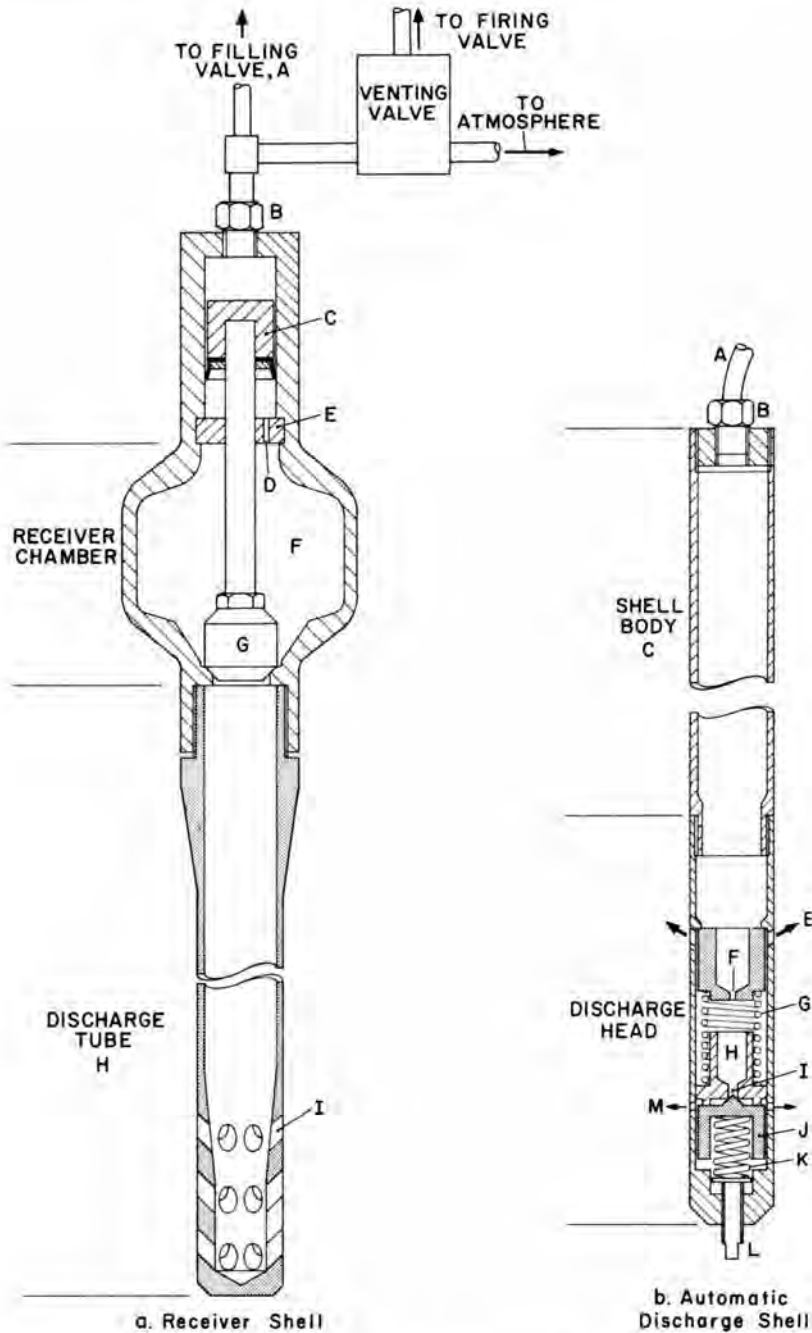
Details of two types of airblasting shell: (a) Receiver shell (C-piston for seating and releasing piston assembly, G-discharge valve, I-discharge ports); (b) Automatic discharge shell (E-discharge ports, F-spring-loaded piston, H-spacer with axial hole I, J-piston loaded by spring K, M-vent ports).
